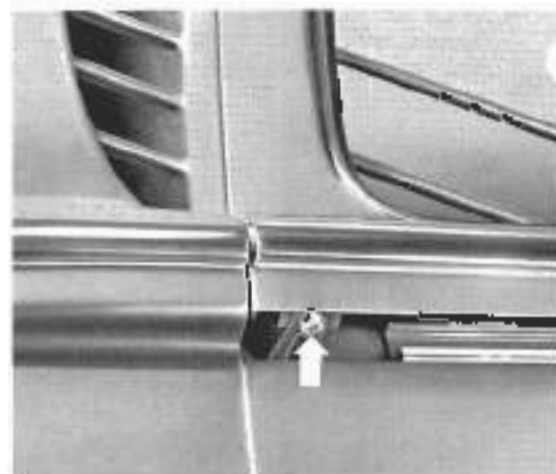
Phillips head screw (arrow) at the rear of the outside runner cover
